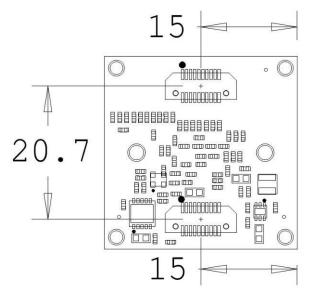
Rear Portion of See3CAM_CU40 Module Board mechanical dimensions
